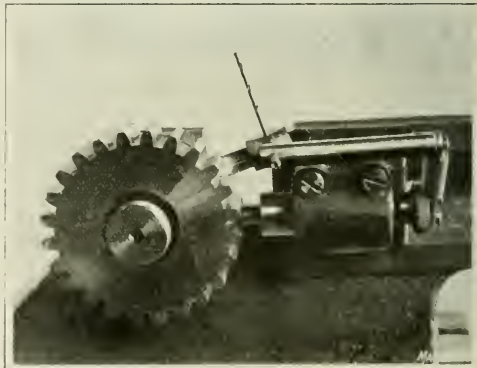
Opposite Side of Fixture shown in Fig. 3, with Attachment for Gear-testing in Position
